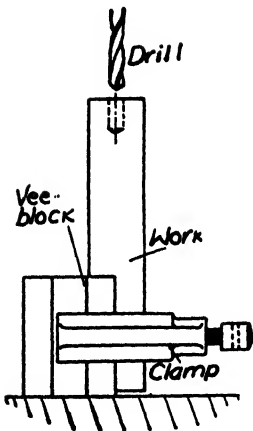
Drilling a Hole in the End of a Cylindrical Part.
